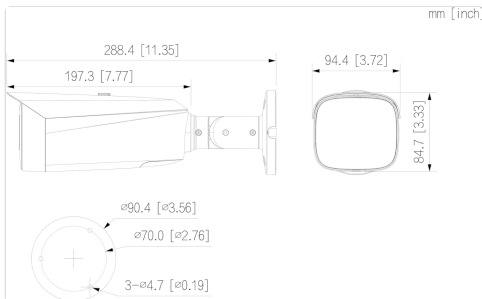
Technical drawing illustrating the precise dimensions of the camera in both millimeters and inches, crucial for accurate installation planning.
